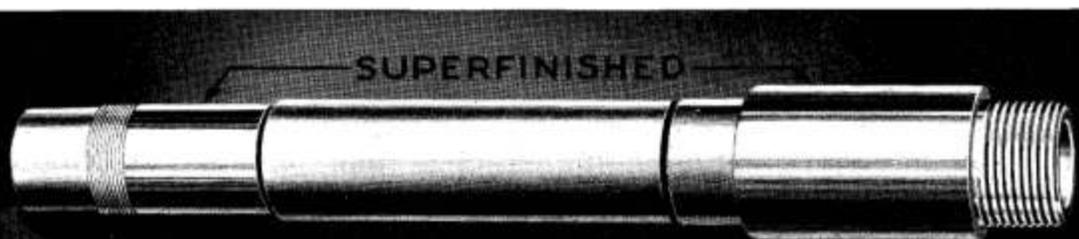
Heat-treated Alloy Steel Spindle with Journal Bearing Surfaces Carburized, Hardened, Ground, and Superfinished.
